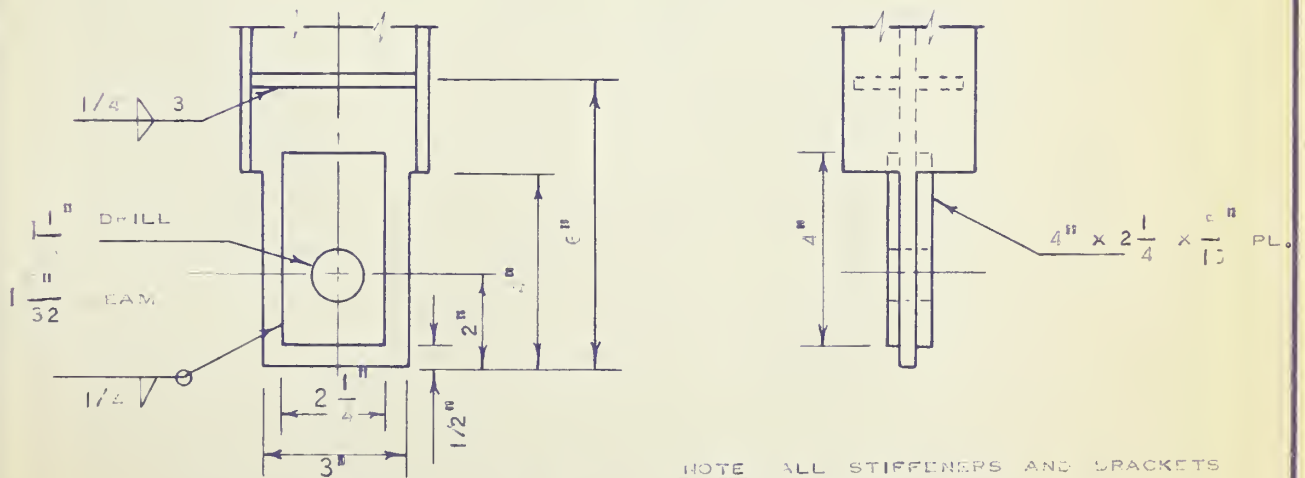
DETAILS OF TEST FRAME CONNECTIONS
